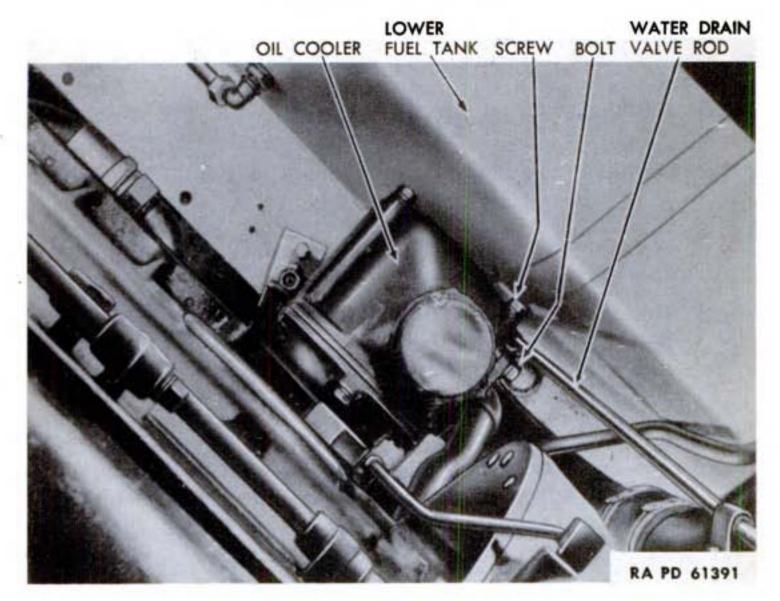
Side of Engine with Water Pump Removed and Oil Cooler Water Outlet Protected
